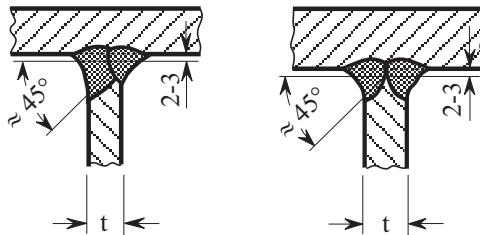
Single and double-bevel welds with full root penetration
